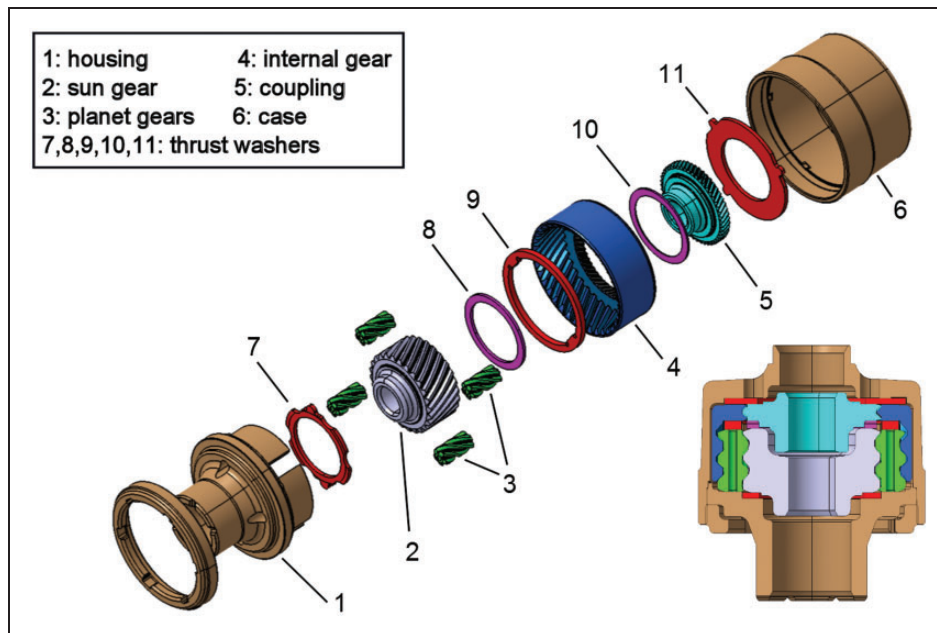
Exploded view and cut-away view of type C TORSEN differential.
